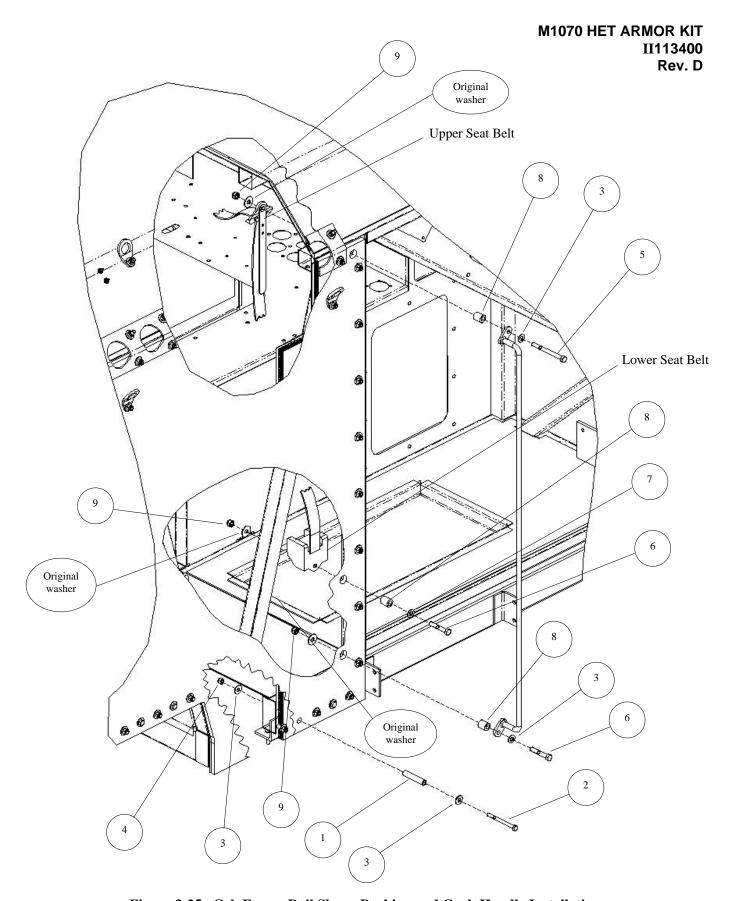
Cab Frame Rail Sleeve Bushing and Grab Handle Installation.
